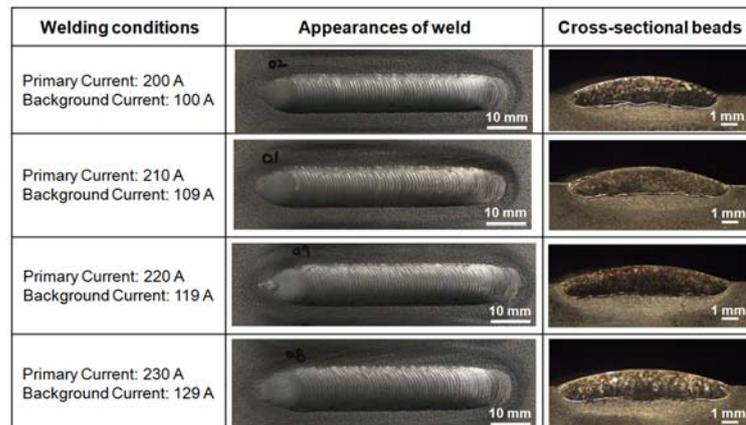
Top appearances and cross-sectional beads obtained during welding of SA240 T304L and ERNiCrFe-7A
